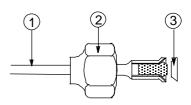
Style 50 (incl. valve depressor mounted into machined flare)
